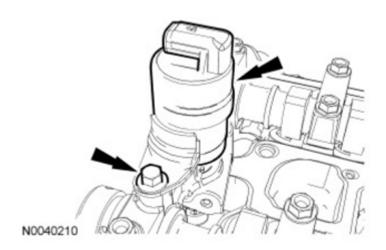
Locating Bolt And Variable Camshaft Timing Solenoid Courtesy of FORD MOTOR CO.
